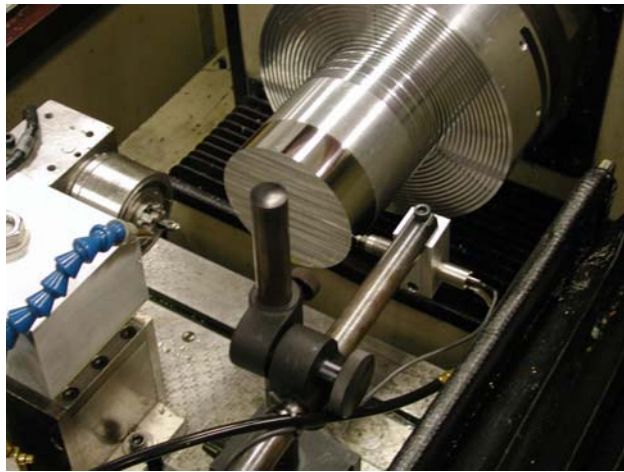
Experimental setup to machine swept sine wave on OD of cylinder and the air-bearing LVDT used to measure the final shape.
